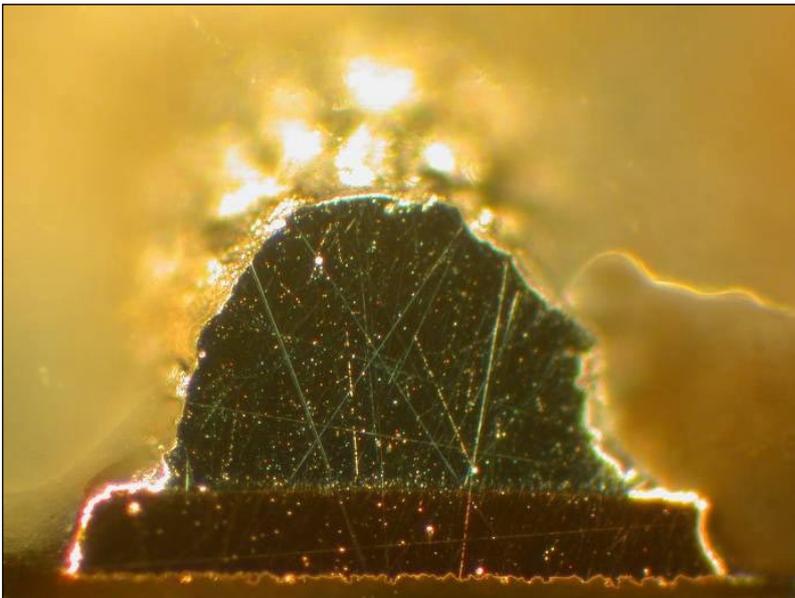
Cross-section of an acceptable solder joint and surface graping
